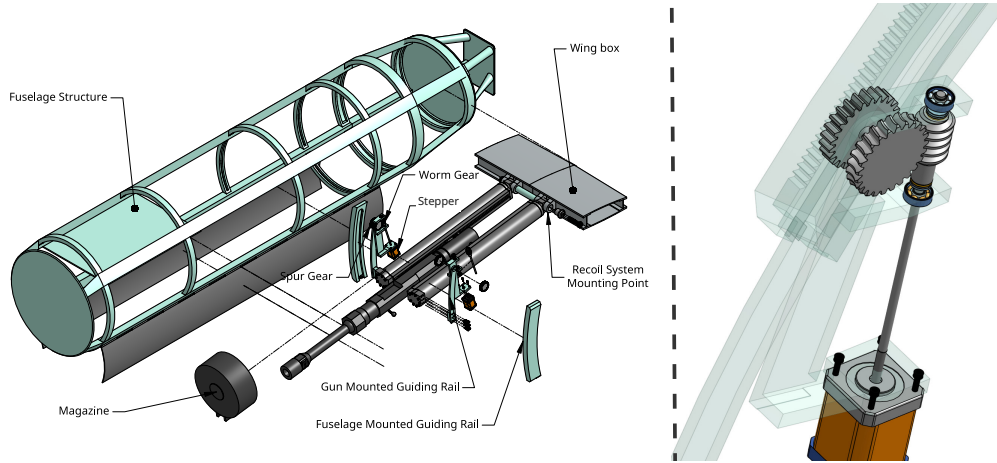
Gun Mounting assembly exploded view and zoomed in view of gear mechanism
